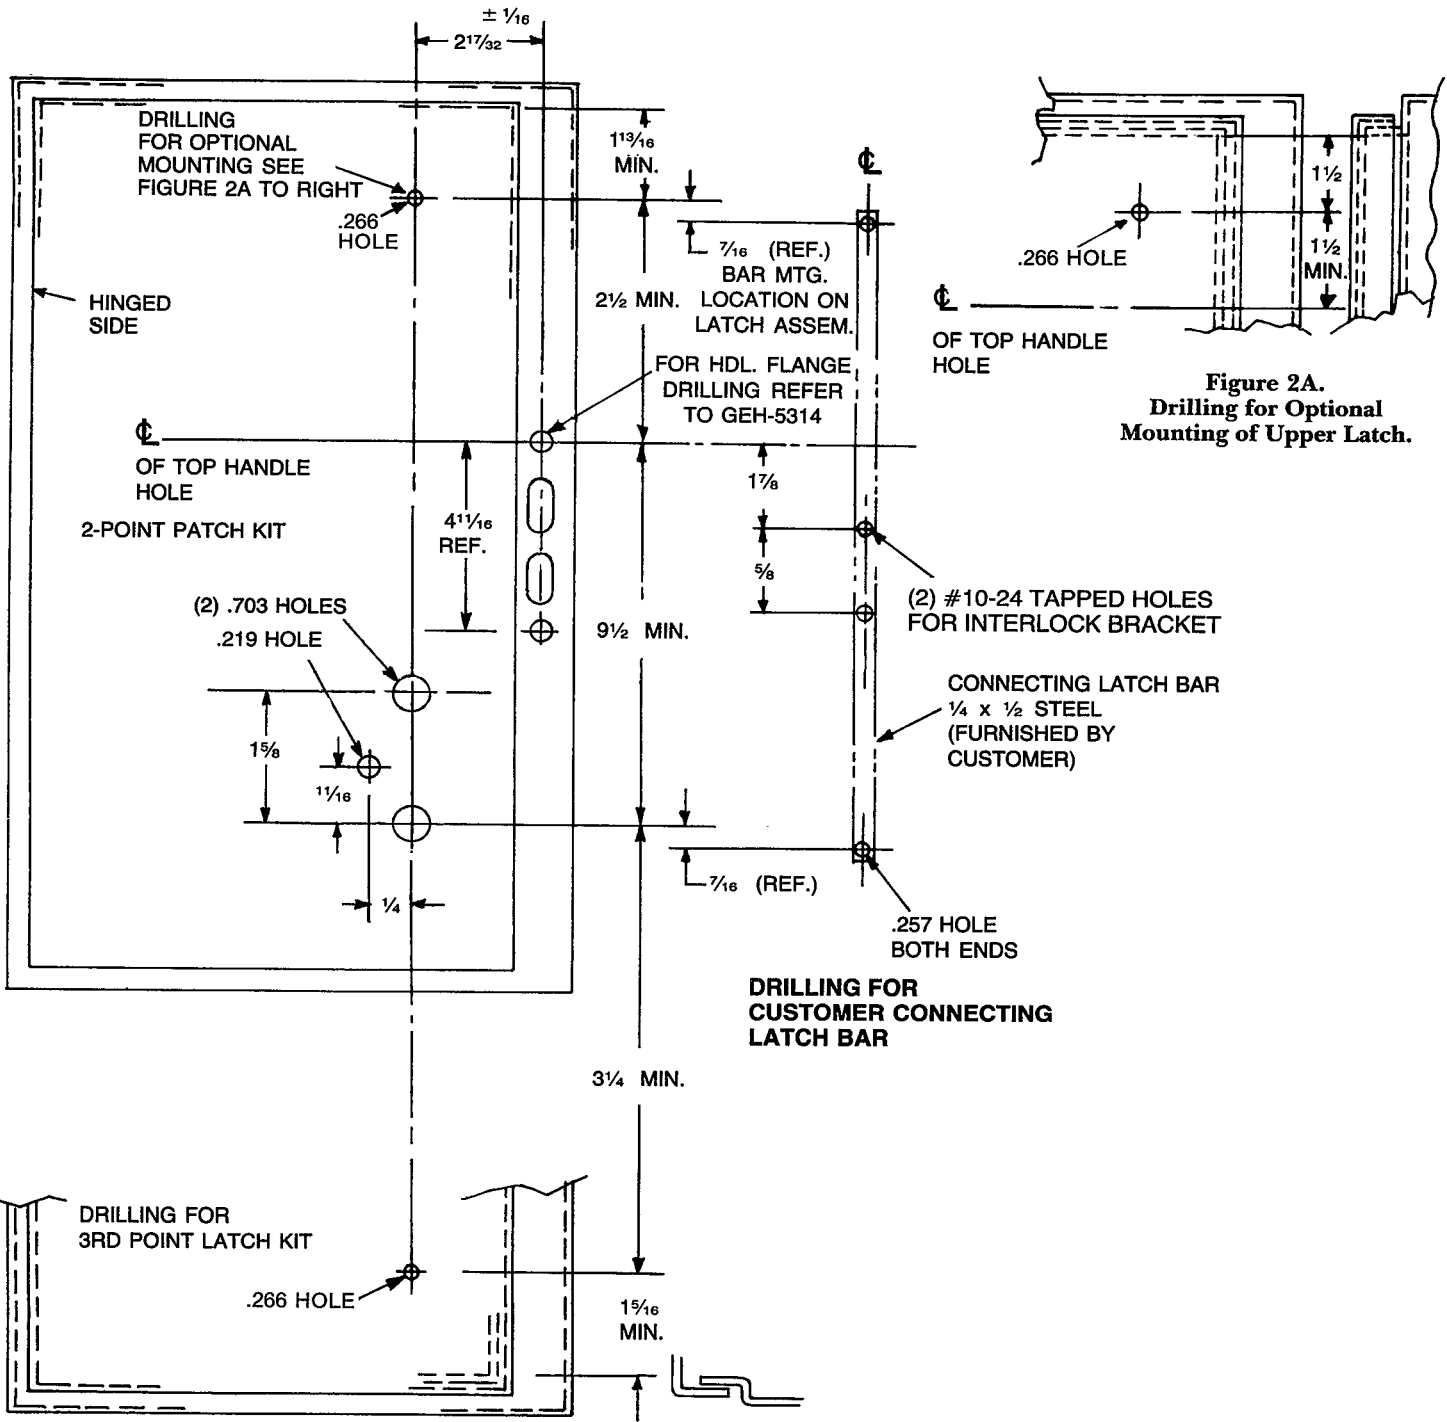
Right hand door drilling – door hinged on left (reverse for left hand door).
